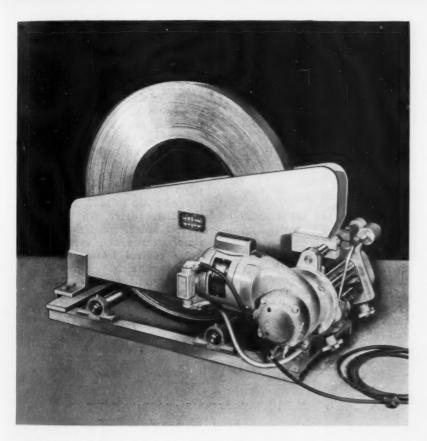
Rear view of coil cradle, illustrating arrangement of motor drive
